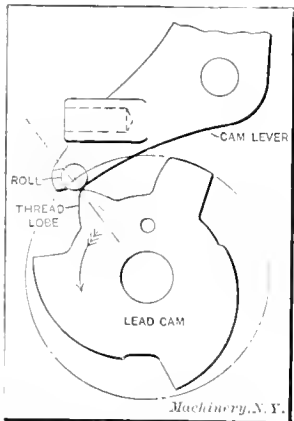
Position of Roll on Thread Lobe when Spindle is reversed
